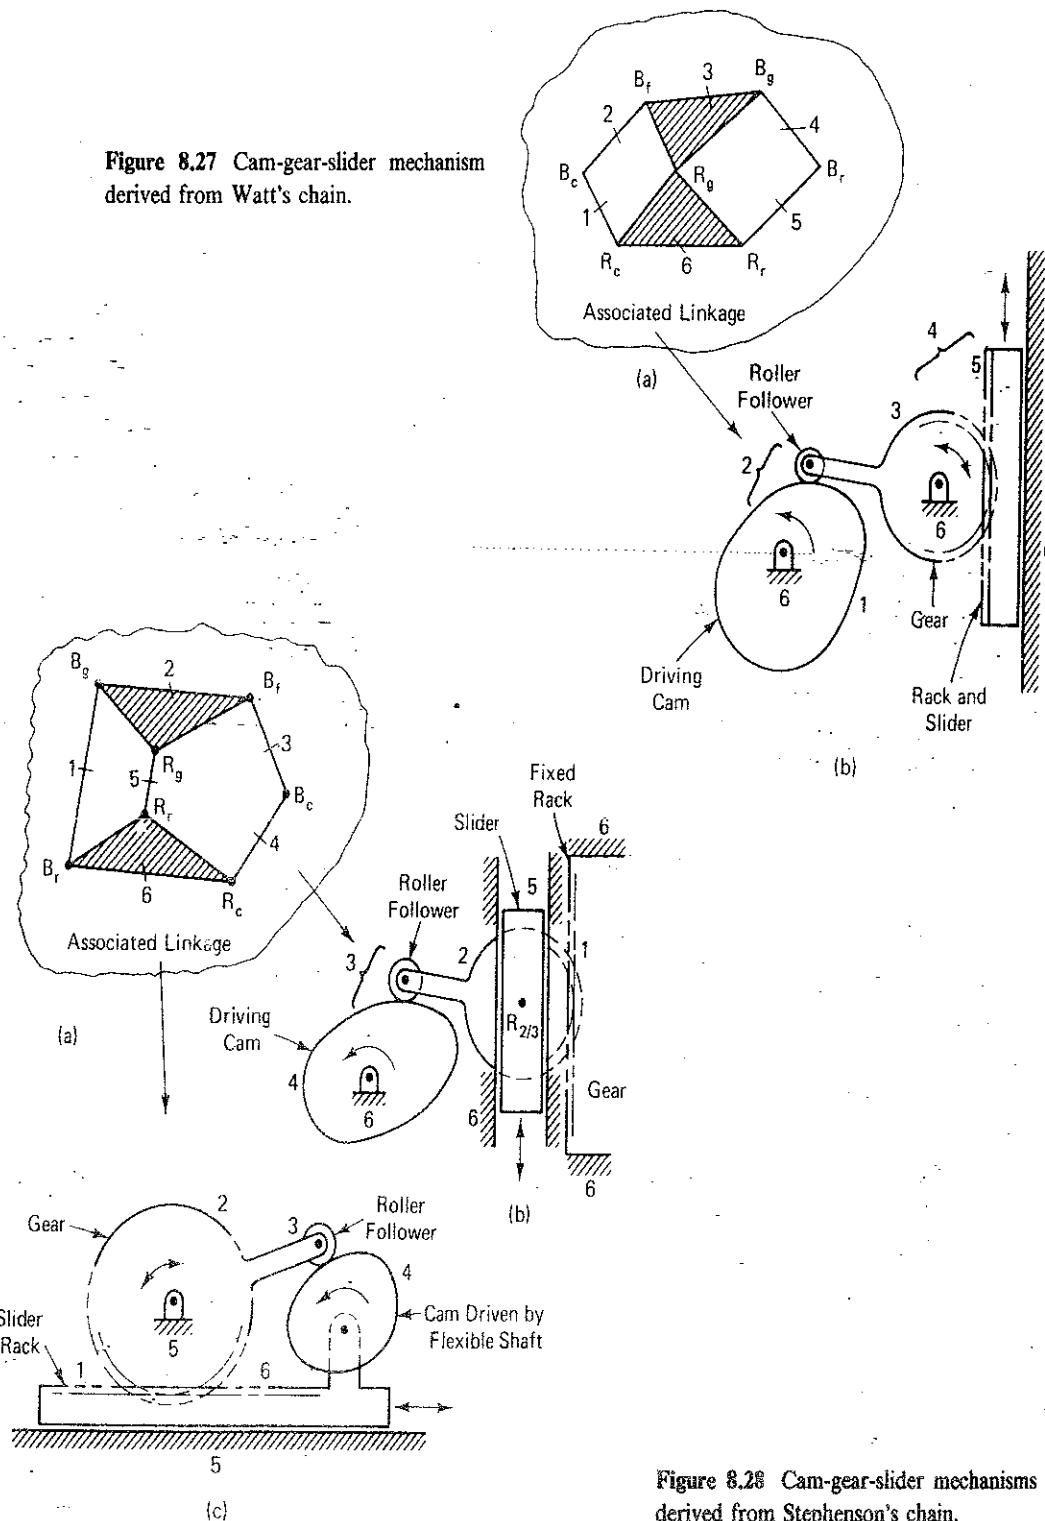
Cam-gear-slider mechanisms derived from Stephenson's chain.
